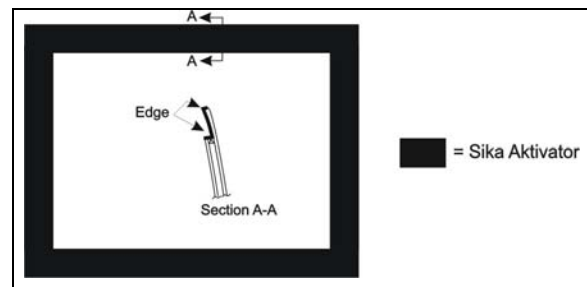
FACE FIXED WINDOW AND HALF-WINDOW – SIKA AKTIVATOR
